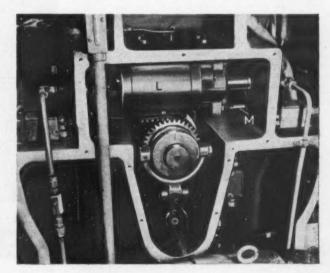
The Drum Carrying the Mainshafts on the 8-spindle Krueger Barnes Machine is Indexed by this Mechanism, which Includes a Moving Hydraulic Cylinder L, with Rack Teeth on the Outside
